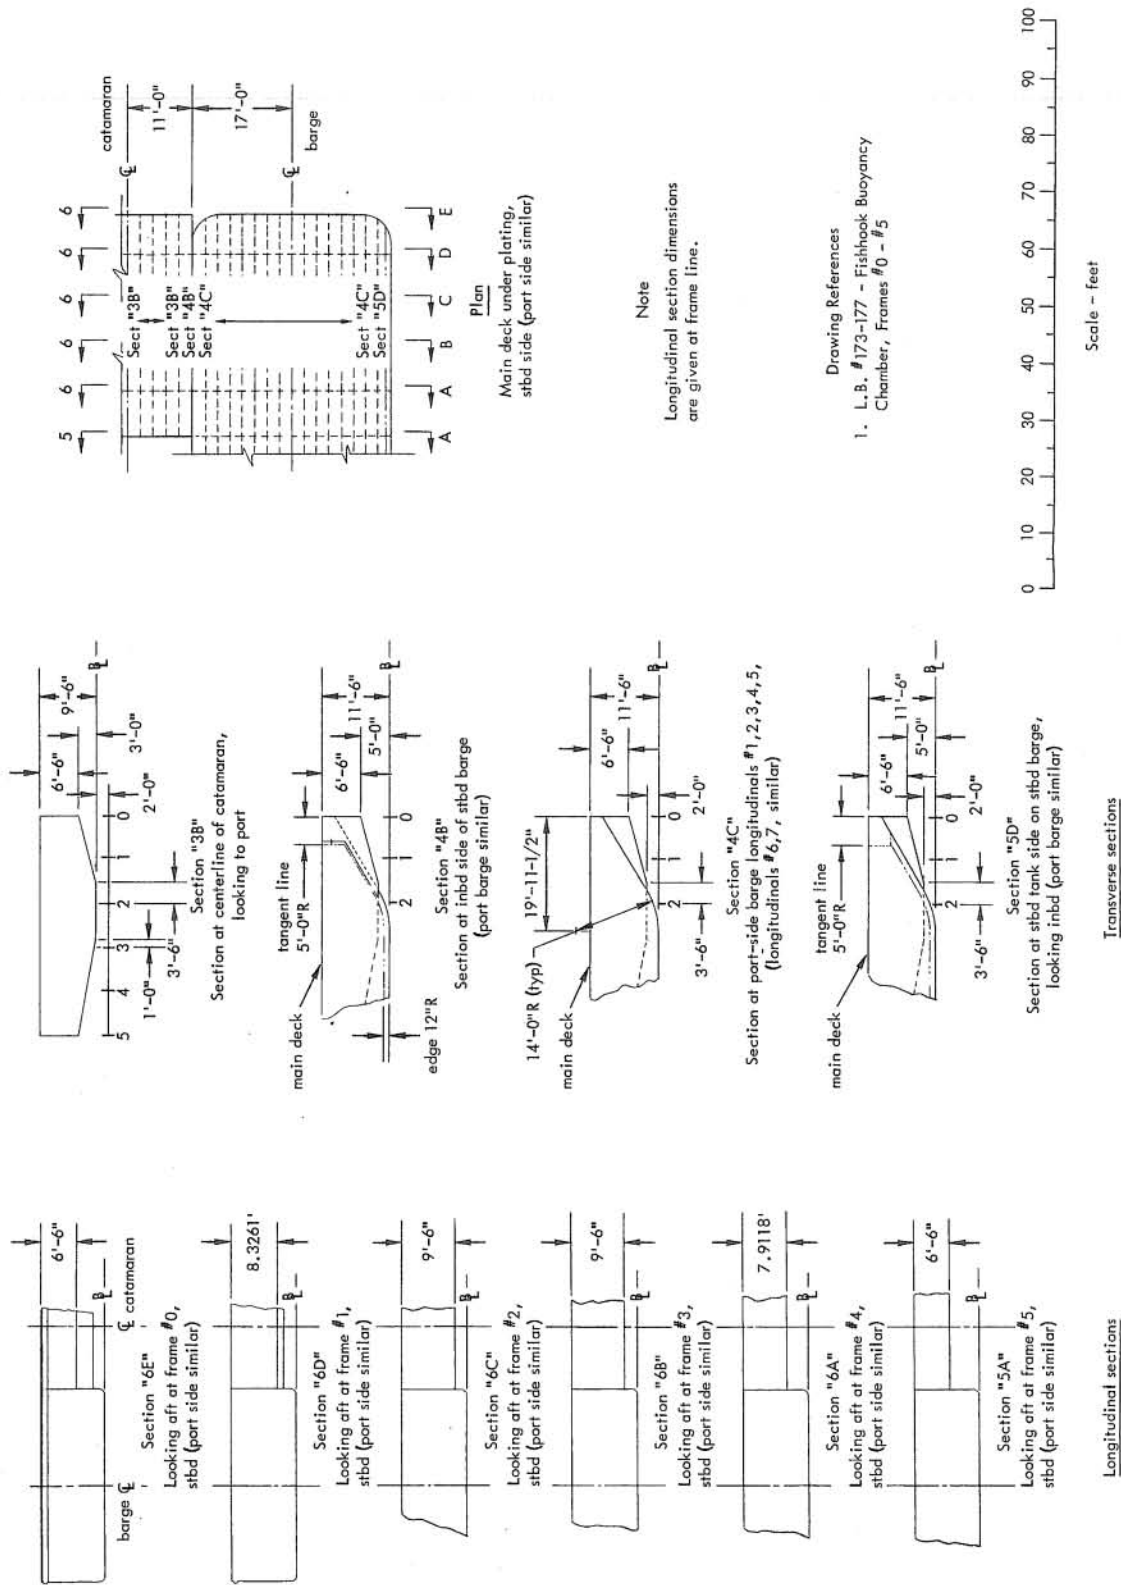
Fishhook prototype barge - transverse and longitudinal sections.
